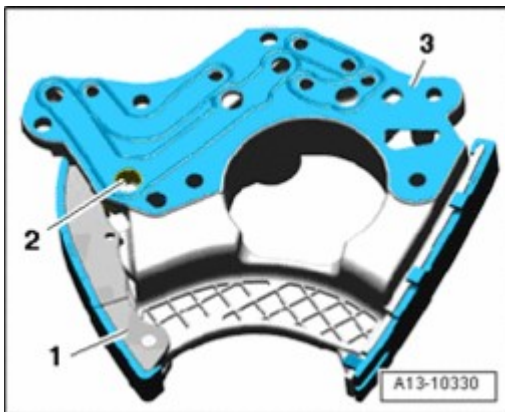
Identifying Chain Tensioner Oil Screen, Gasket & Chain Tensioner
